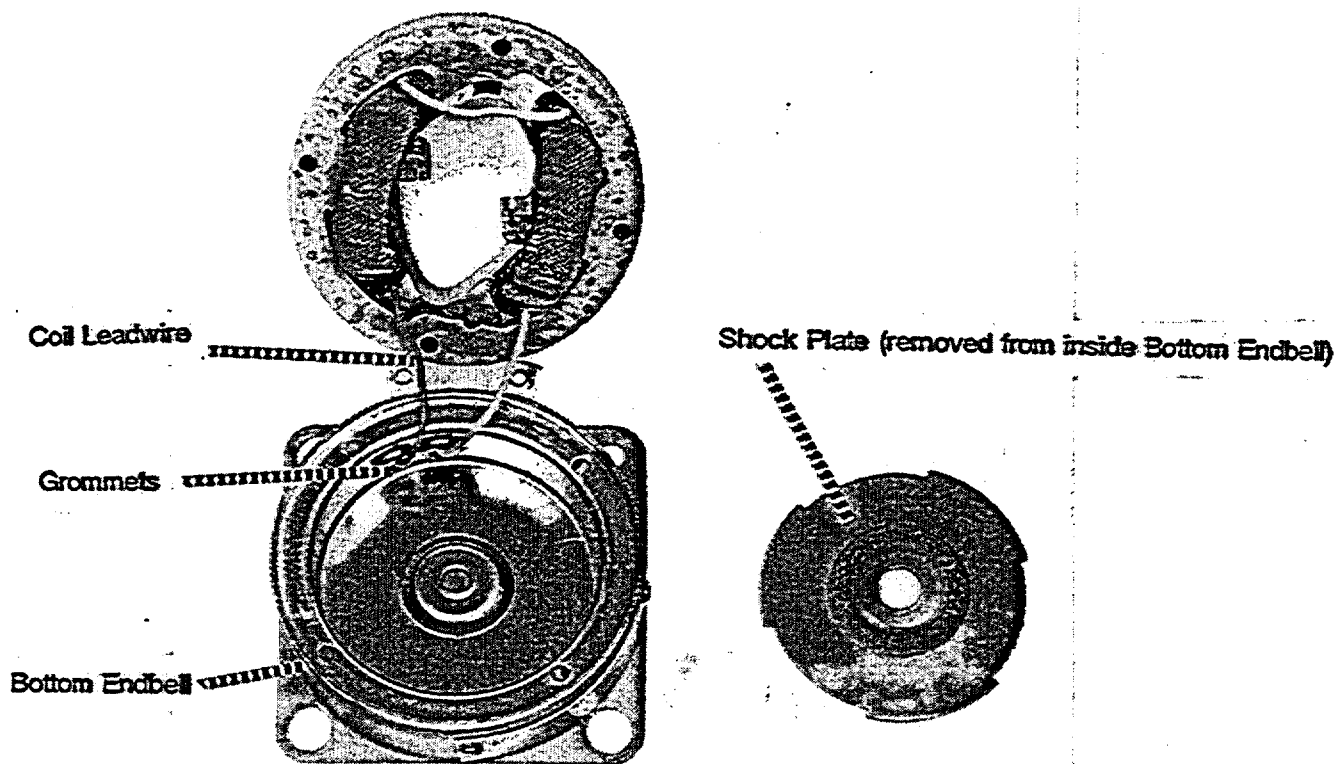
Rotor Assembly and Stator Assembly Removed – Non-Latching Relay
